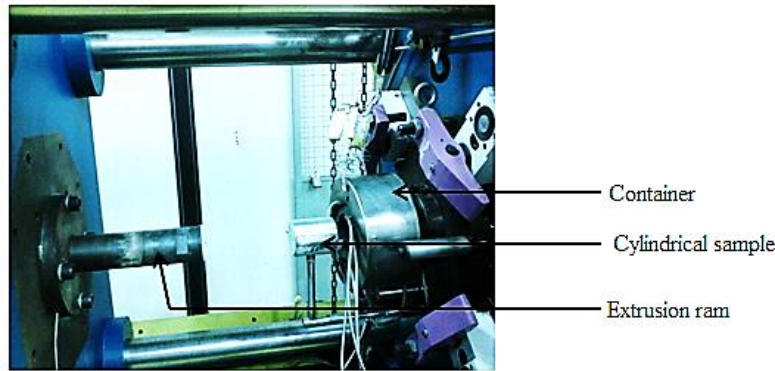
Close-up view of extruder showing the container, sample and ram
